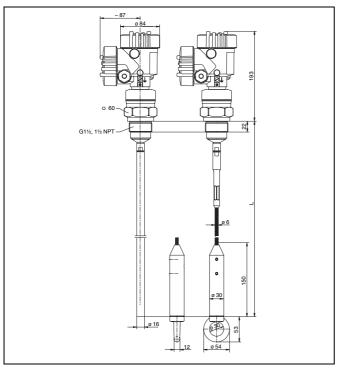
VEGAFLEX 62 - cable and rod version with thread (double chamber housing)
